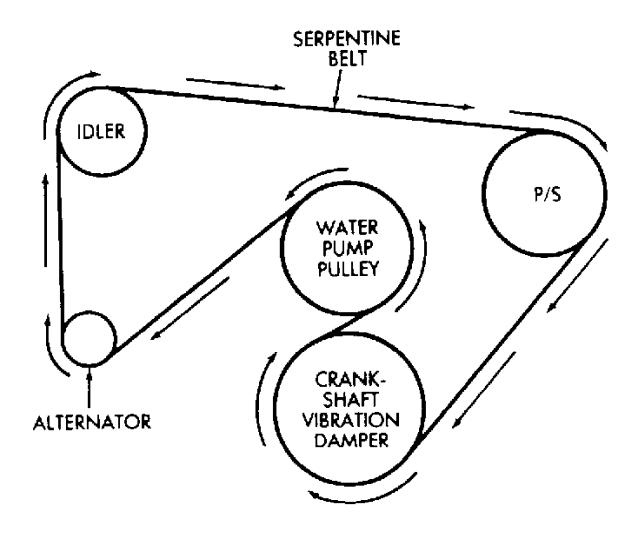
Alternator & P/S: 1989 4.2L Wrangler (California) Courtesy of Chrysler Motors
